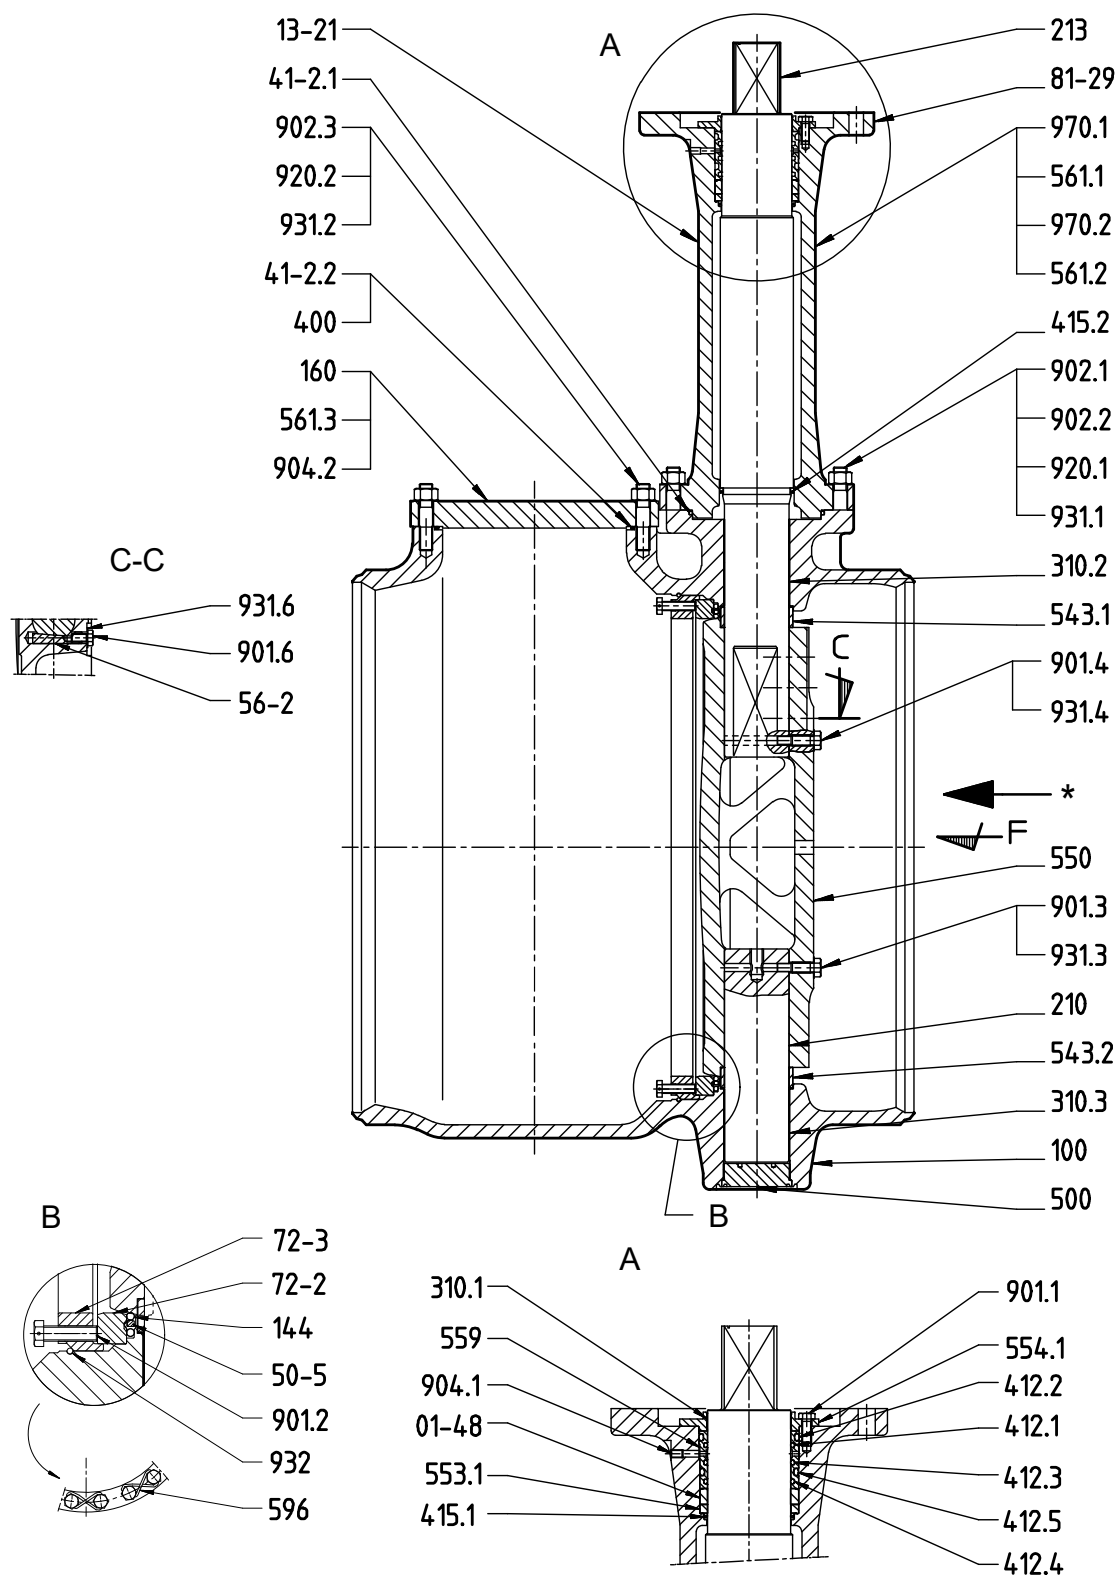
Sectional drawing of TRIODIS 150 CRYO BWSE - DN 900-1100 (36-44 inch)
